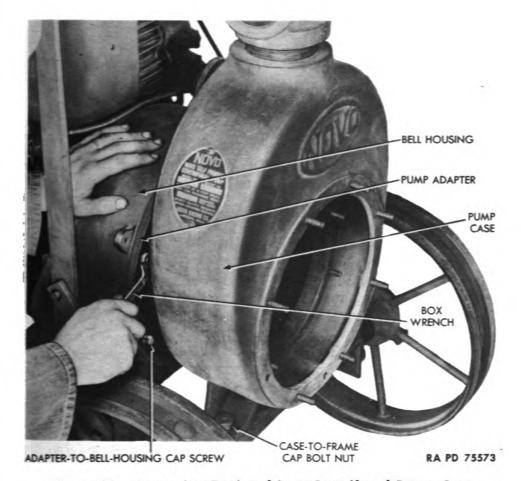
Removing Engine-driven Centrifugal Pump Case
